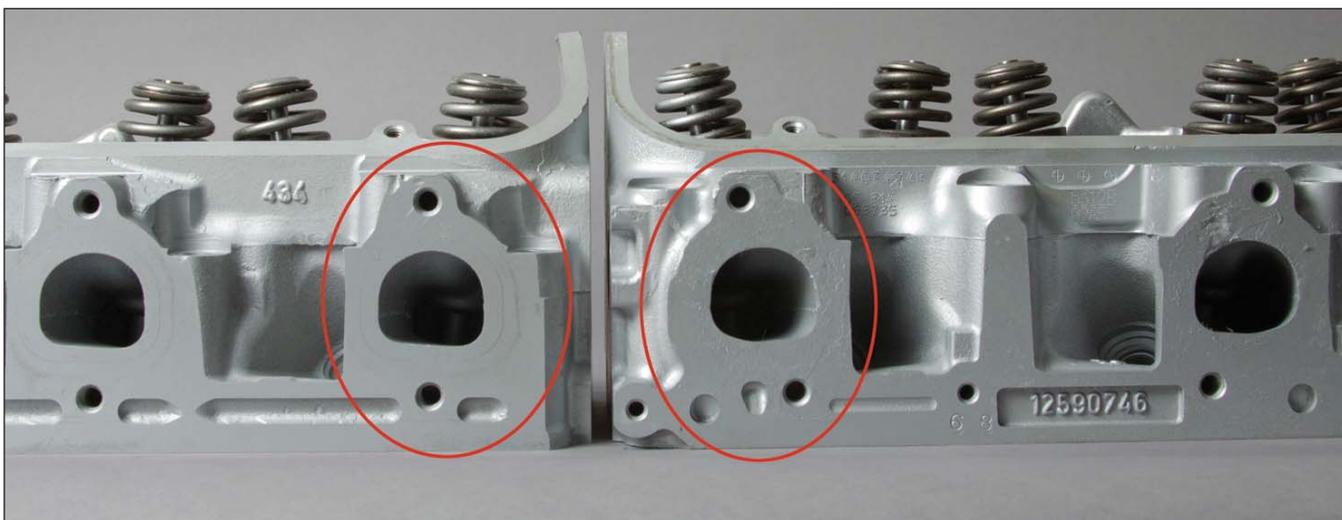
The location and shape of the exhaust ports for the late 3.5L/3.9L heads (right) were modified, too.
